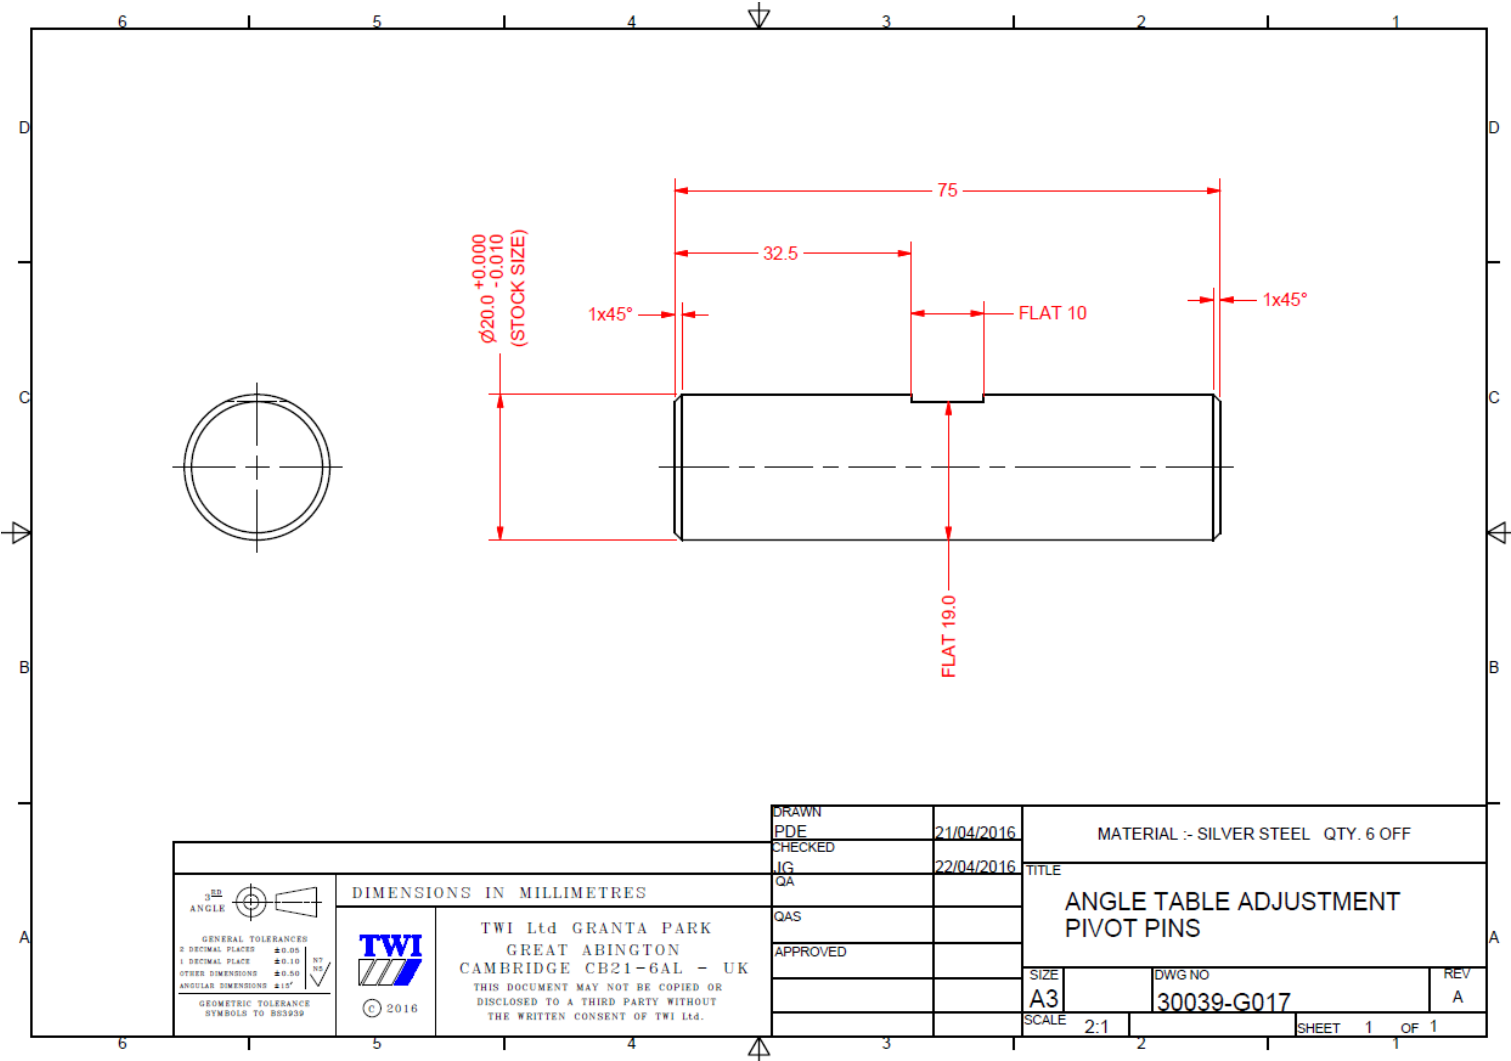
Technical drawing of the adjustment pivot pins of the tilting table
